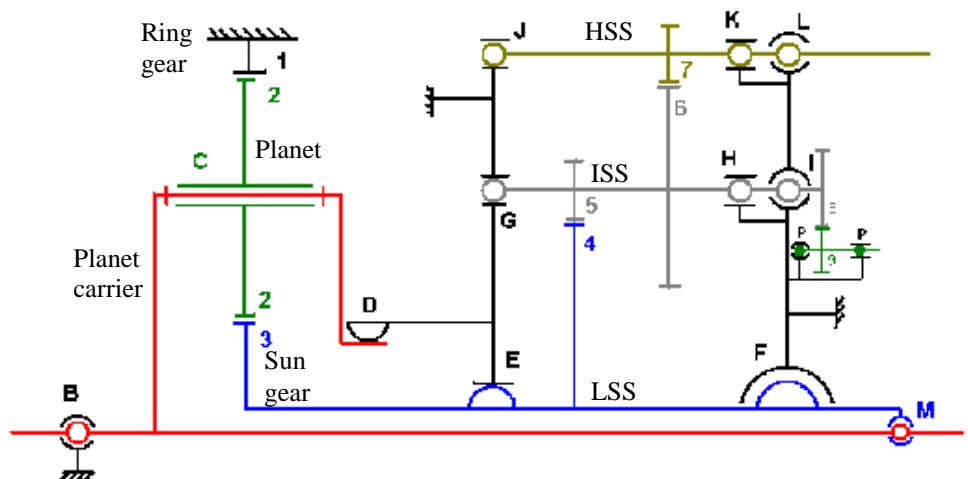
Schematic layout of gearbox components (see Table 1 for LSS, ISS, HSS) Gears indicated by numbers; bearings by letters
